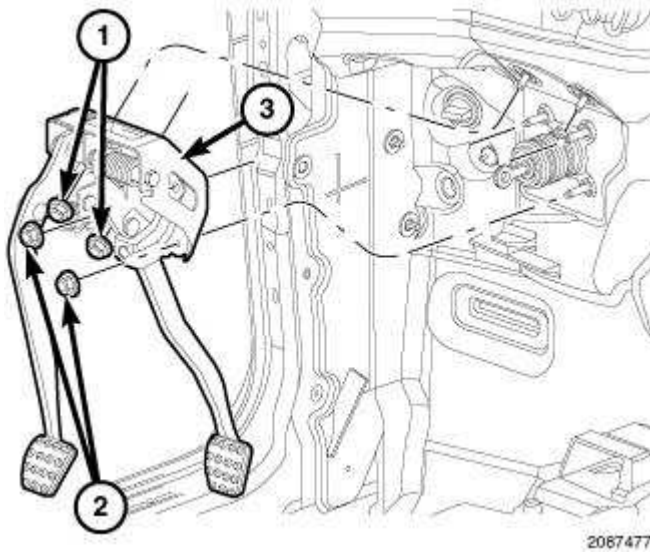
Remove/Install Clutch/Brake Pedal Assembly & Mounting Nuts
